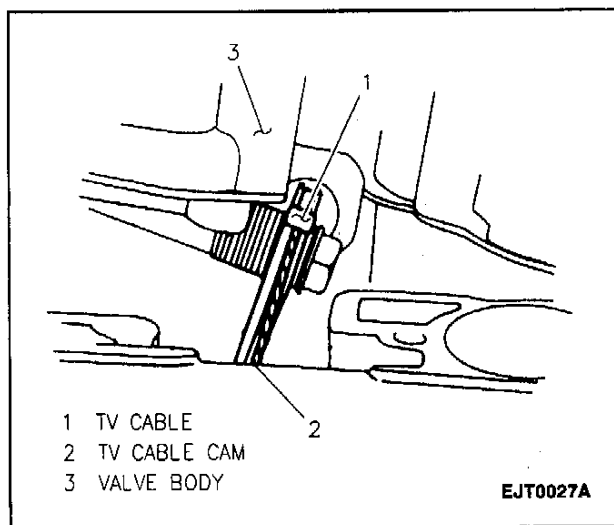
Removing TV Cable at TV Cable Cam (03-72LE, 4-Speed)
